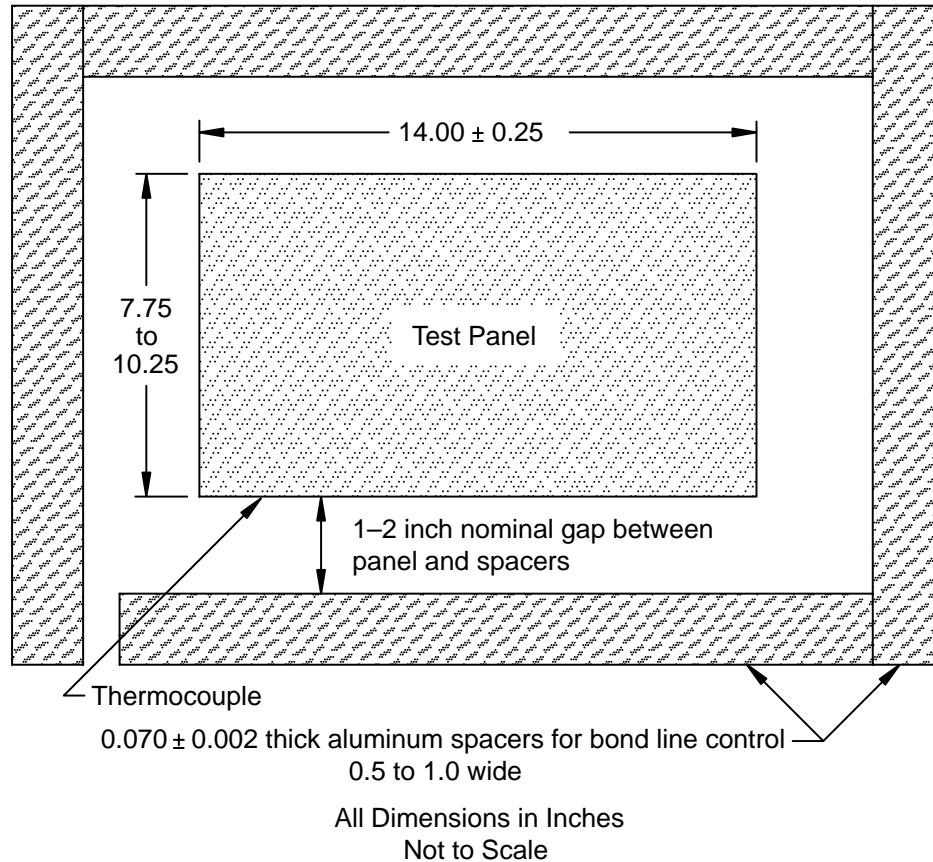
ALUMINUM SPACERS FOR BONDLINE CONTROL FOR PEEL TEST
